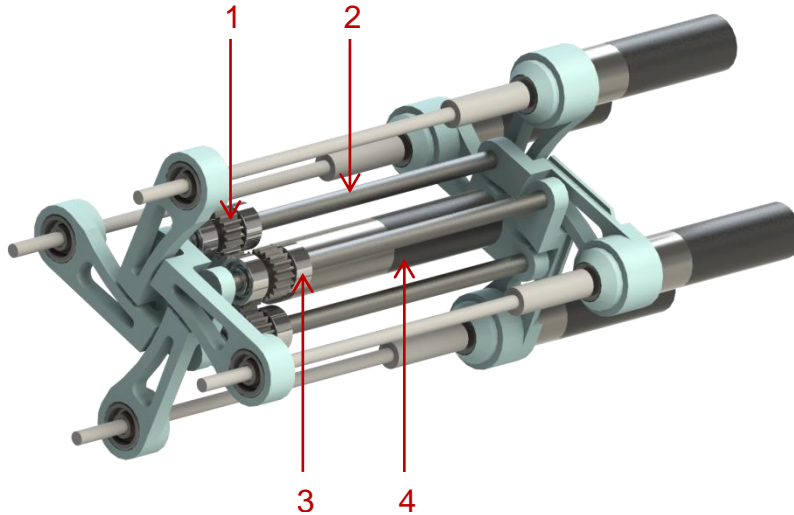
A computer model showing the screw motors and transmission exposed. The motor and gears that operate the expansion of the arms are also exposed in the centre. The central motor is connected to a gear, which turns the four surrounding gears, which in turn rotate the arm axles. The arms can be seen in their overlapping state. Annotations show: 1) Arm expansion gears; 2) Arm shaft connecting front and rear arms attached to gearing allowing for synchronous movement between arms; 3) Bearings to maintain alignment of arm shafts; 4) Central motor which drives movement of the arms.
